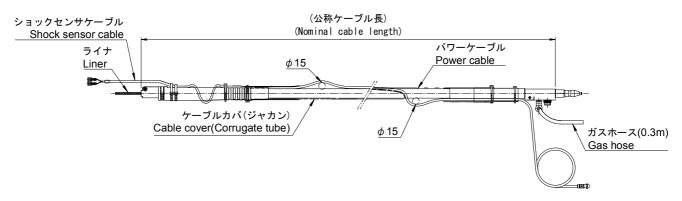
Outline drawing of the coaxial power cable (For NB6 / NB6L manipulator)
